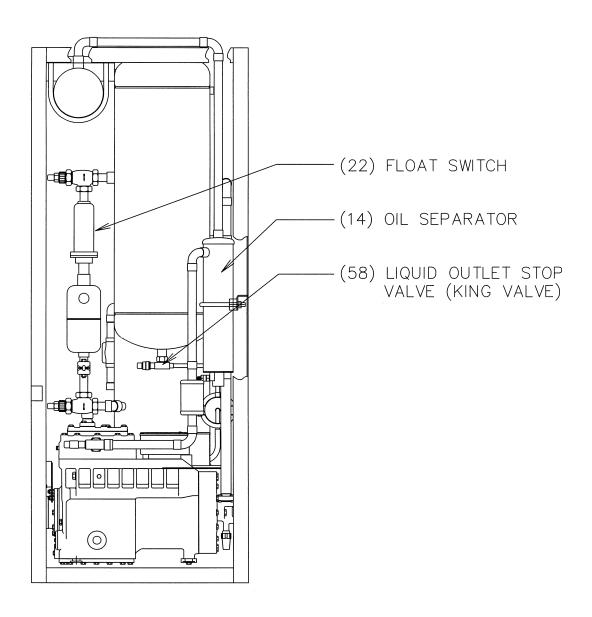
Assembly (Water Cooled) Right Side View
